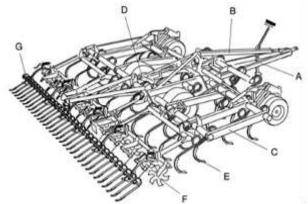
Cultivator for total processing, equipped with working tools with elastic support[5] A -Drawbar; B-Push rod; C-Frame; D-Wheel mounting; E-Cultivator vibratory tools; F-Levelling unit; G-Tiller (accessory);
